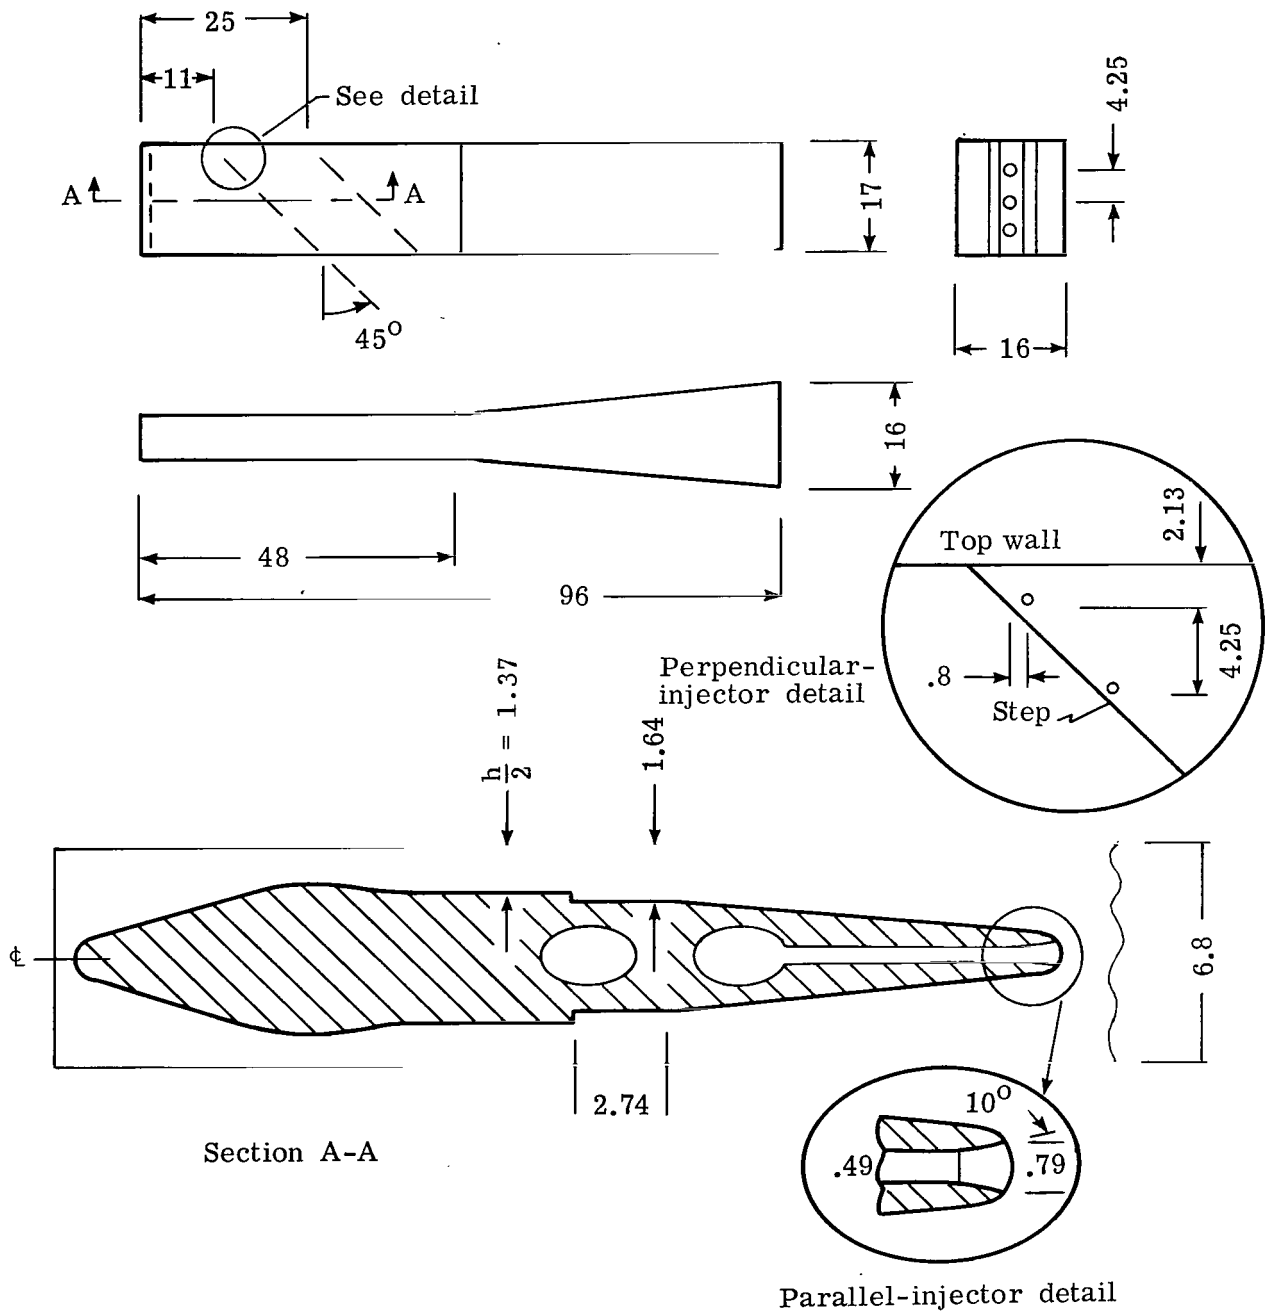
Dimensions of swept-strut fuel injector. All dimensions are in cm.
